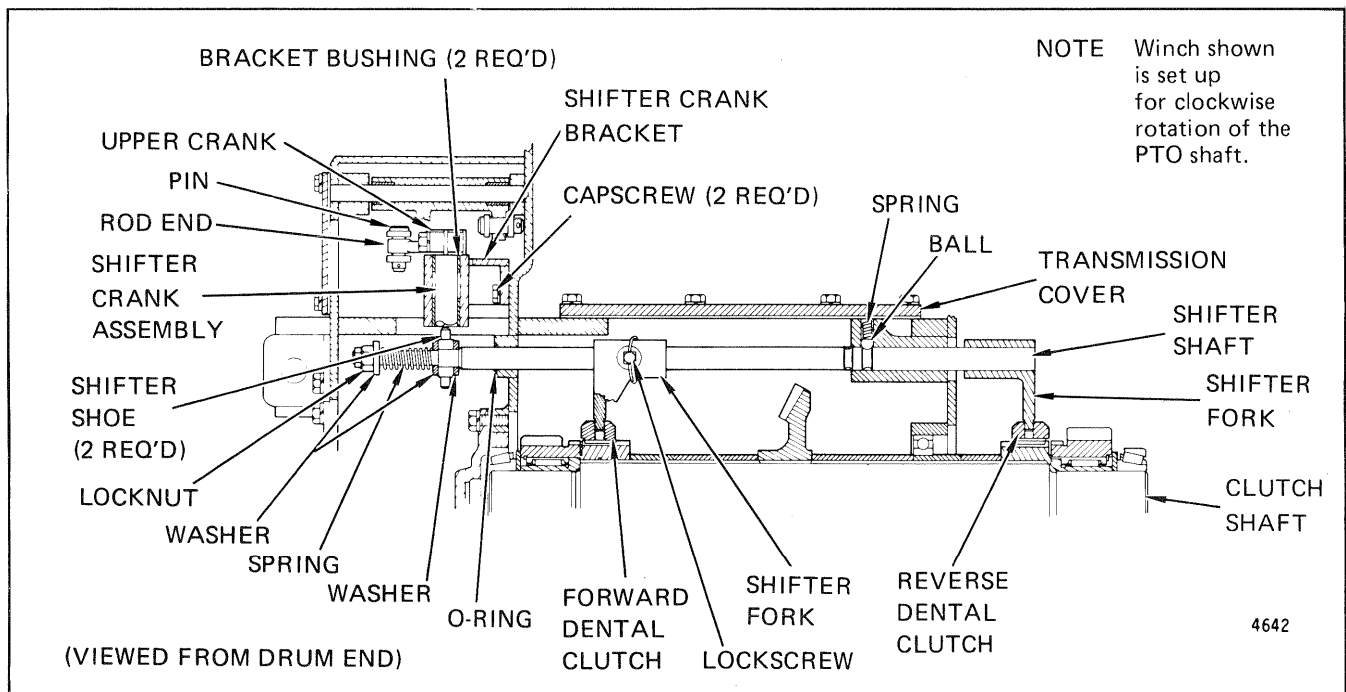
SHIFTER ARRANGEMENT, DIRECT DRIVE WINCH
